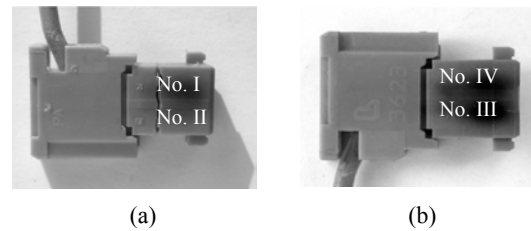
Outside observation of the burned socket housing. (a) The face of the housing; (b) The backside of the housing
